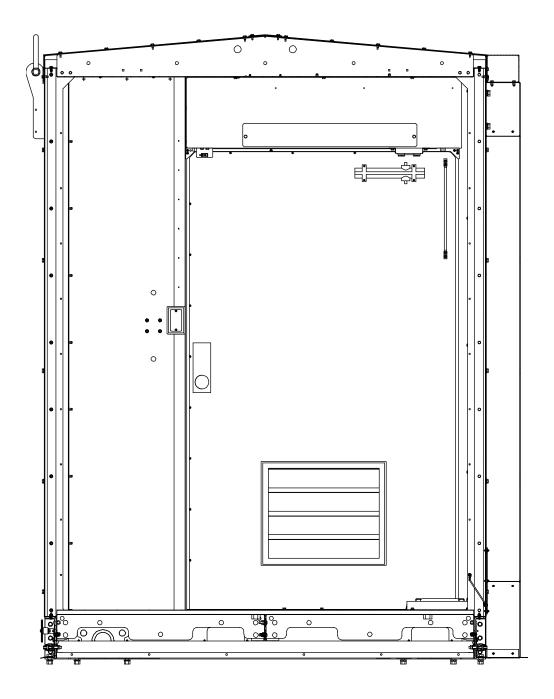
Wall Detail Views (cont'd from previous page, cont'd on next page)
